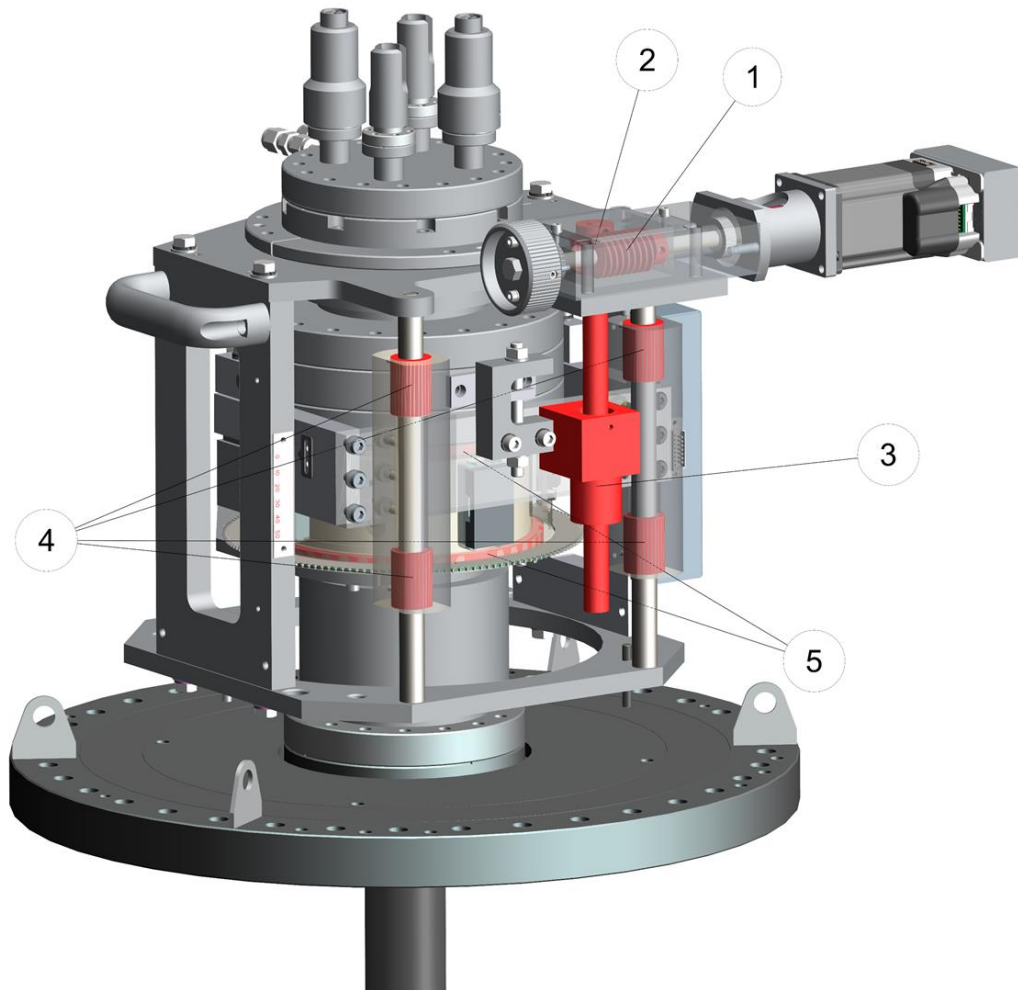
Schematic showing the manipulator parts (highlighted red) that require lubrication after bakeout (automated transfer systems). 1. Worm gear, 2. Guiding bar, 3. Ball screw, 4. Vertical bearings, 5. Upper and lower radial bearings.
